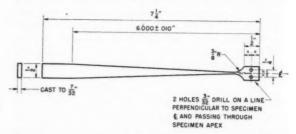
Dimensions of the cantilever beam specimen used for relaxation tests.
